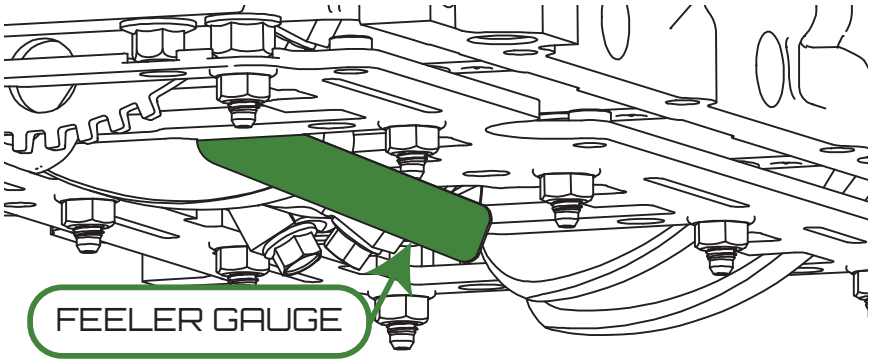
Inspecting Clearance with a Feeler Gauge
